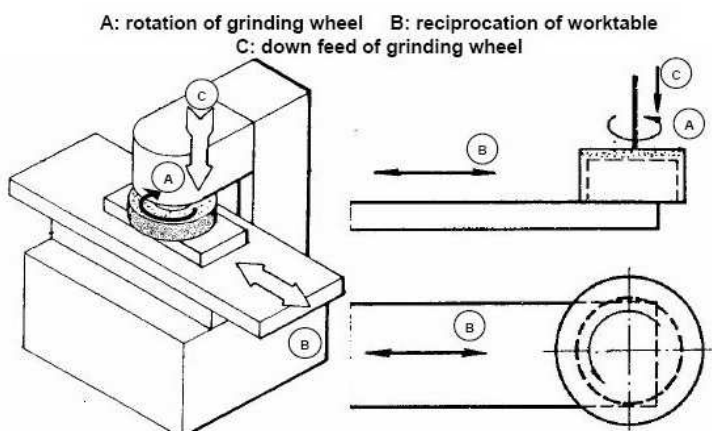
Vertical spindle and reciprocating table grinding machine
